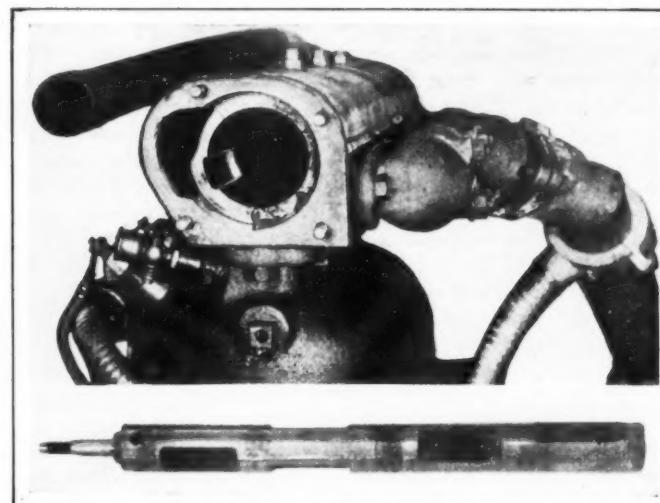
Mounting of the valve housing and, below, the valve withdrawn
